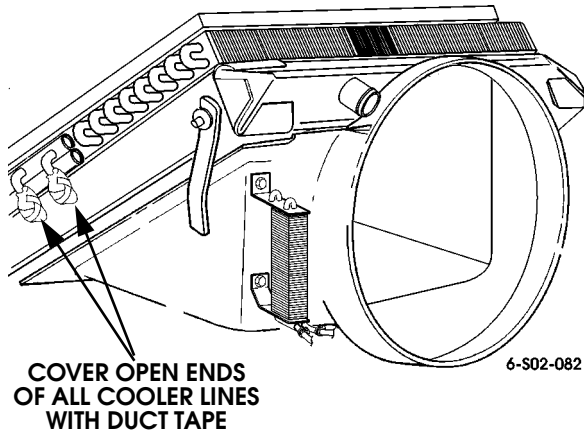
Covering Open Ends of Oil Cooler Lines
